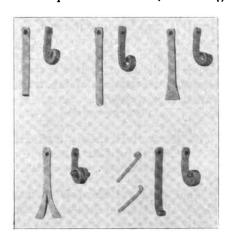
SIMPLE FORGED SCROLL ENDINGS WITH BLANKS.
